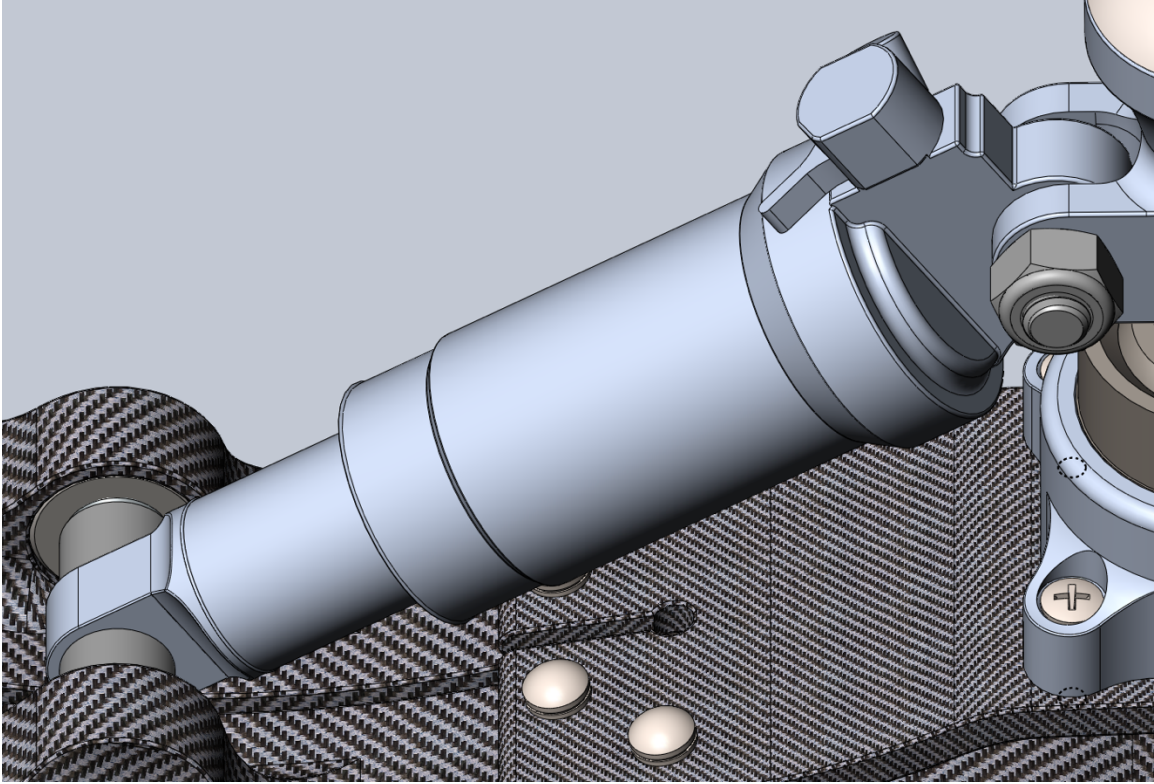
Alternate Detail View of Fox Float DPS Shock Connection Points
